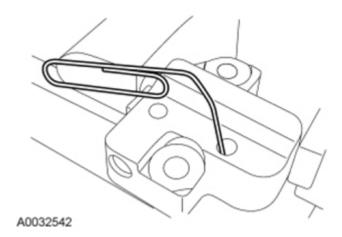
Installing Paper Clip Into Hole In Tensioner Housing Courtesy of FORD MOTOR CO.
